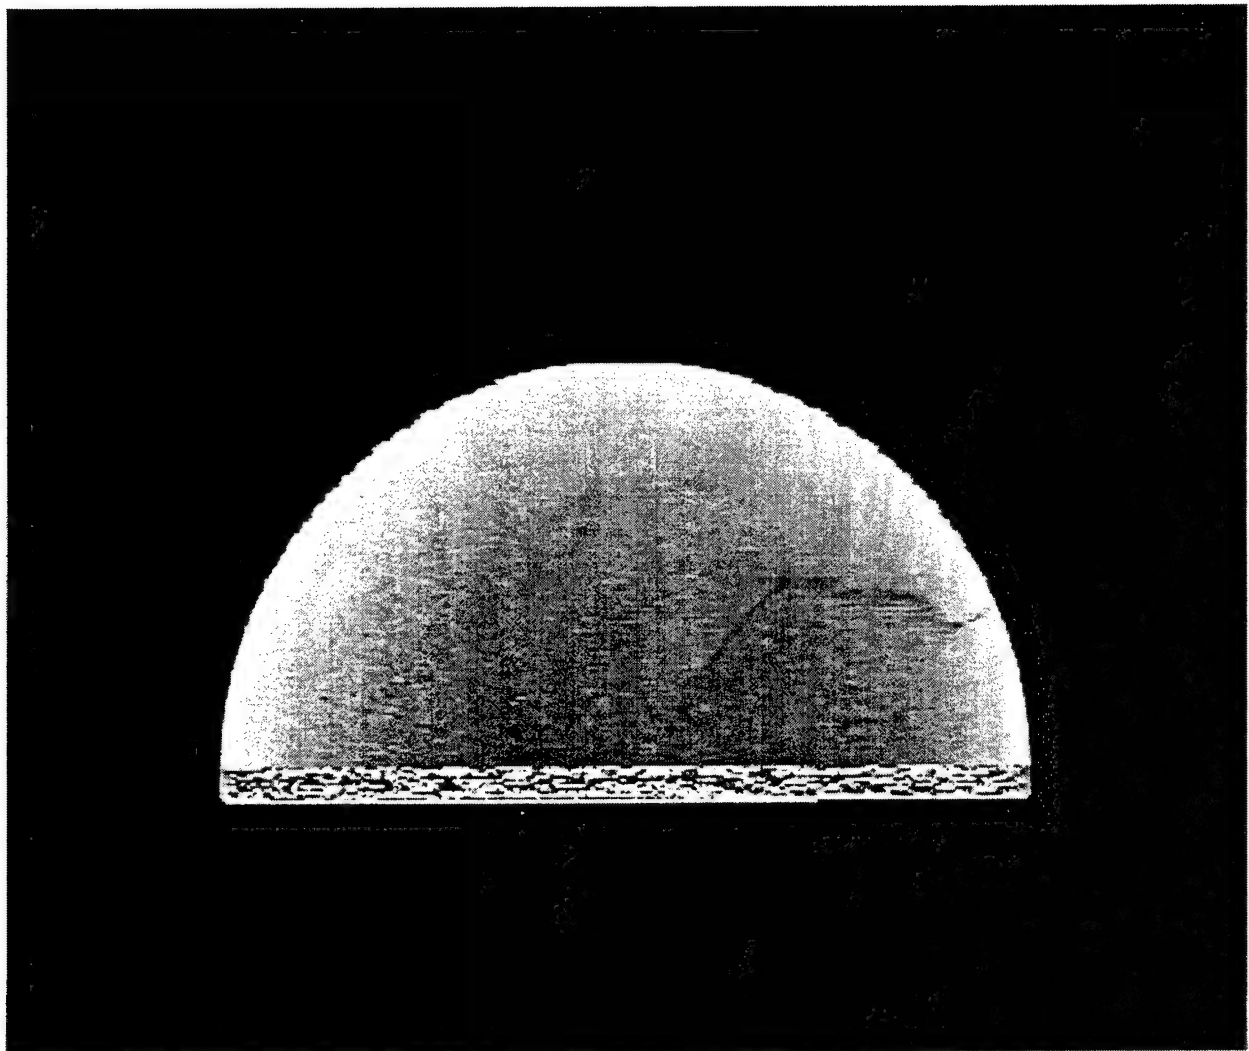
6.75 mm from bottom of disk with 65° rotation about X-axis.
